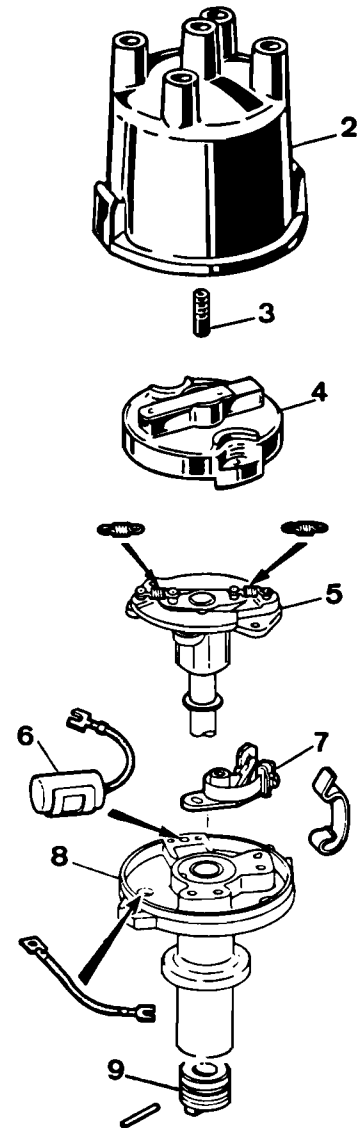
Exploded view of Marelli distributor (Sec 7)
